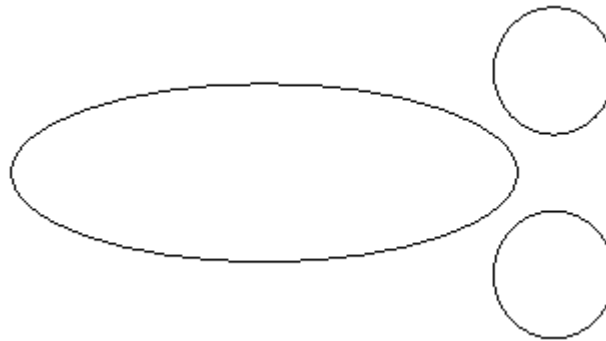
Plan View - Arrangement of Laser beam Spots (Round) Relative to the Arc Weld Pool (Ellipse) to Achieve Maximum Weld Toe Wetting and Spreading
